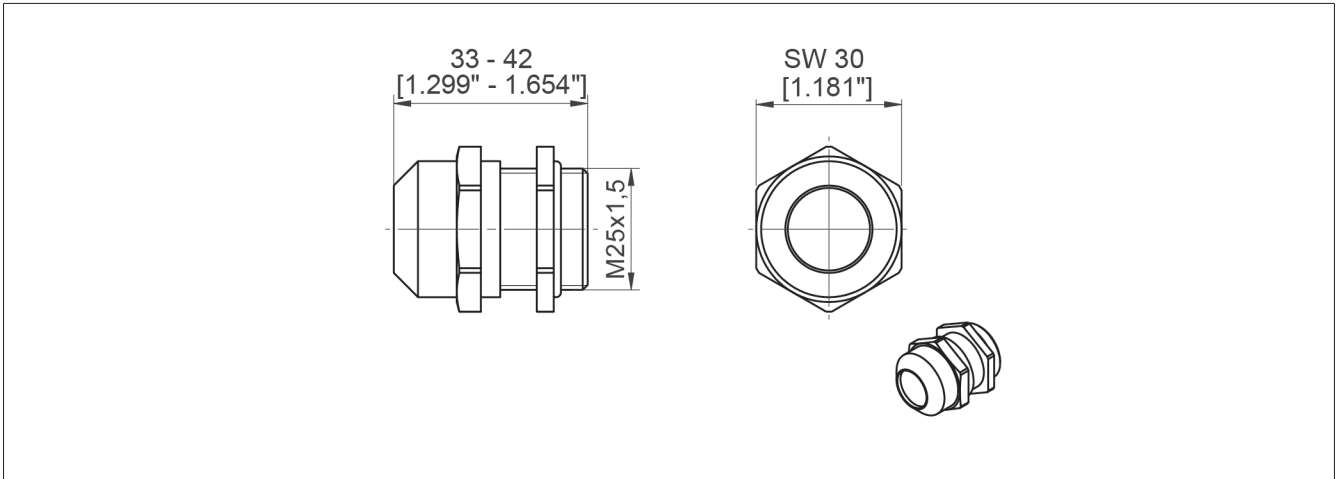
Offshore cable screw connection; material: stainless steel (V4A); clamping range 9...17 mm
